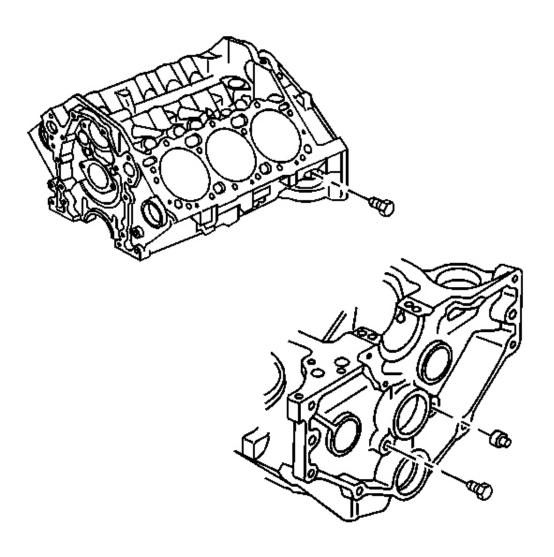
Engine Block Oil Gallery Plugs Courtesy of GENERAL MOTORS CORP.
